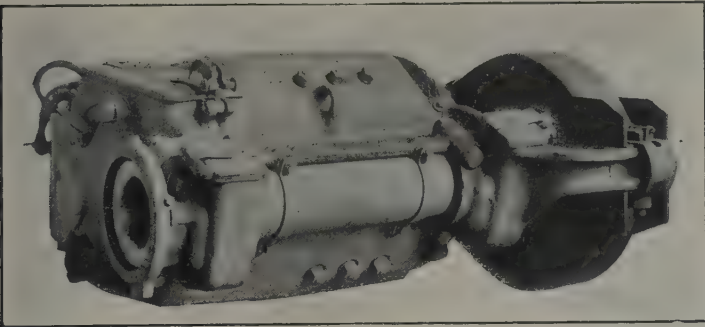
No. 334-V-8, 750-1500-Volt, Direct, Commutating Pole Railway Motor.
